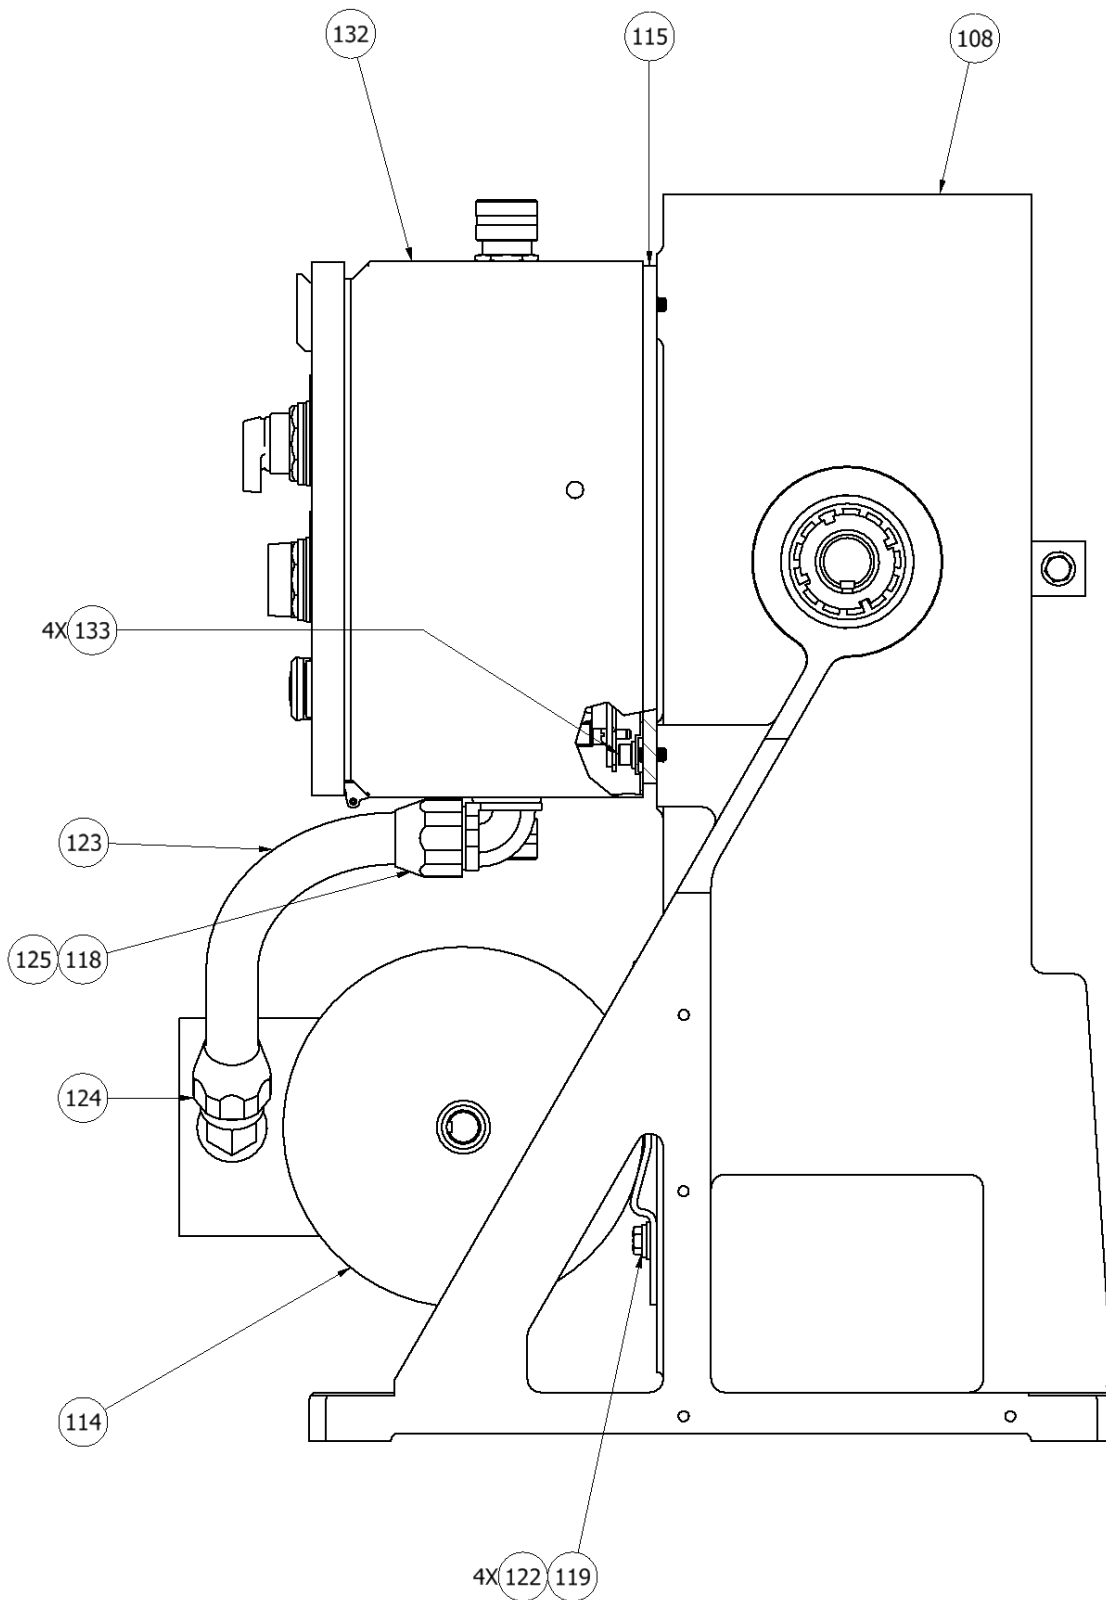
MOTOR AND CONTROL BOX MOUNTING
